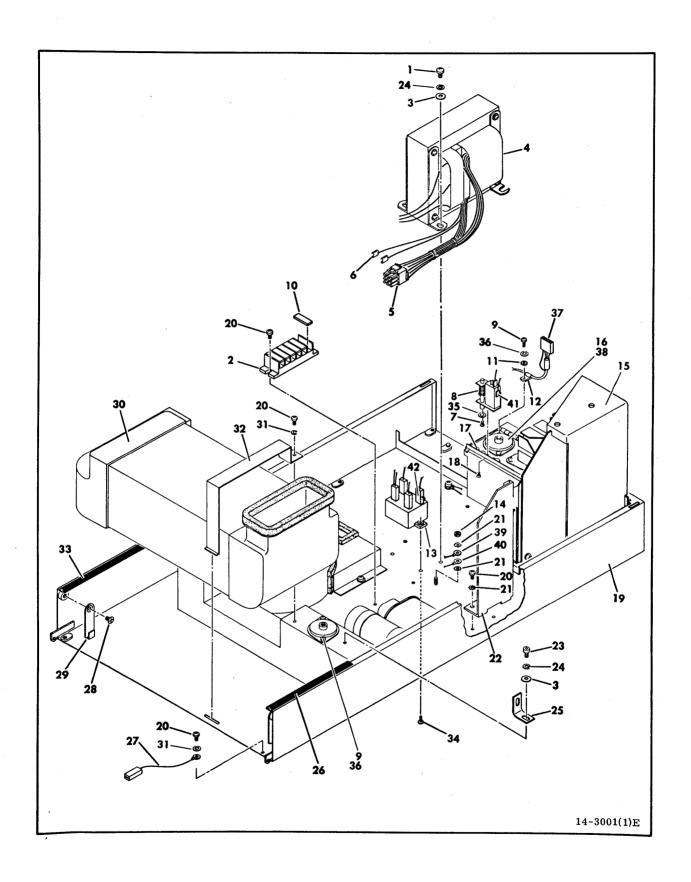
Base Assembly 832619XX (Sheet 1 of 4) 83322150 W
